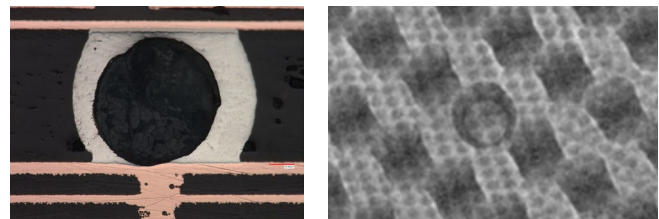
Image of very large solder joint void formed during Reverse Hybrid surface mount process
